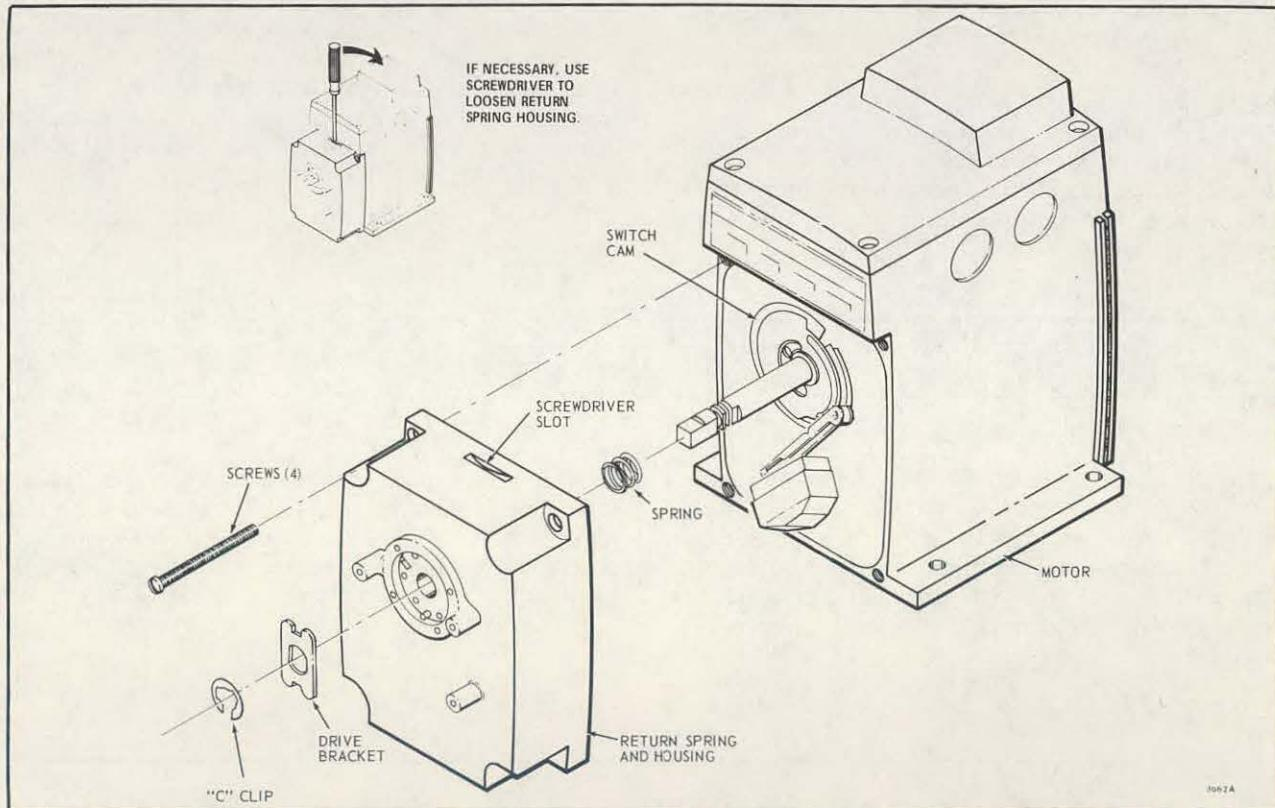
REMOVING THE RETURN SPRING HOUSING TO ADJUST AUXILIARY SWITCH.
